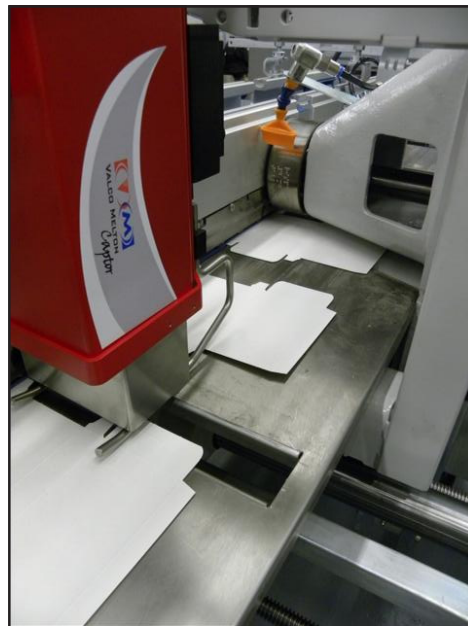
Captor Inspecting Braille Marks on Boxes
